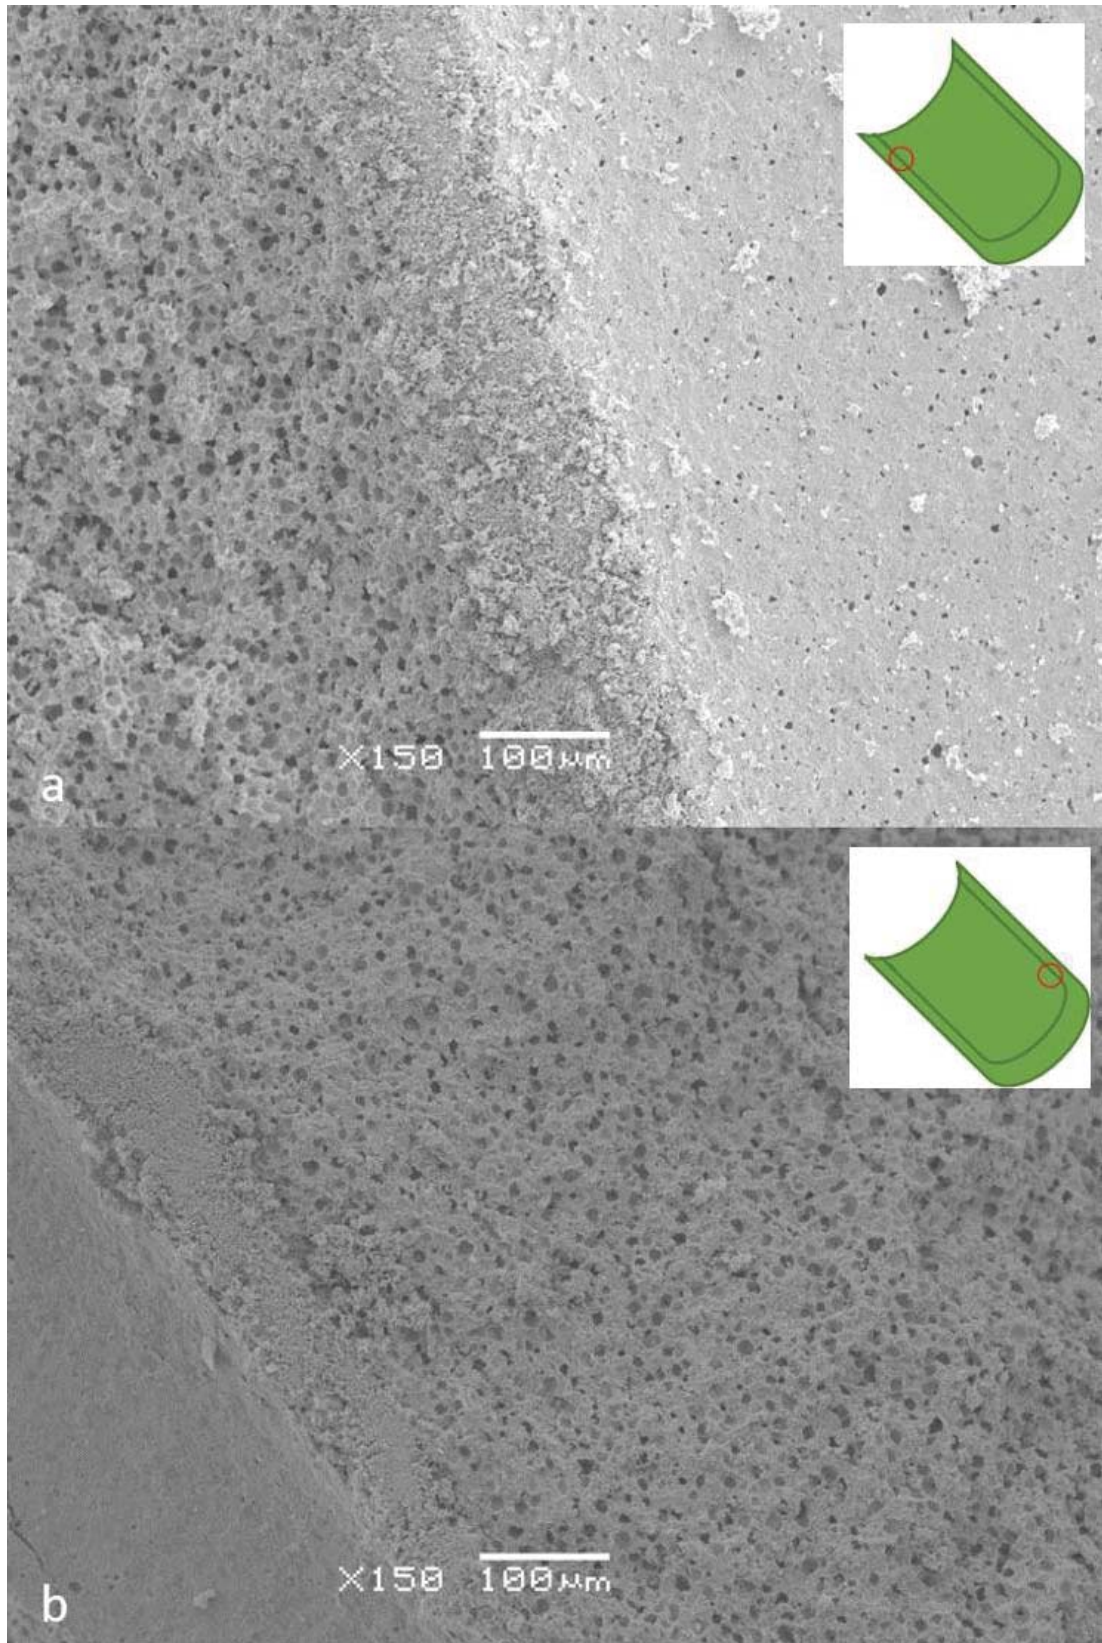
Fracture surface for (a) Extrudate C and (b) Extrudate B heated at 1000 °C
